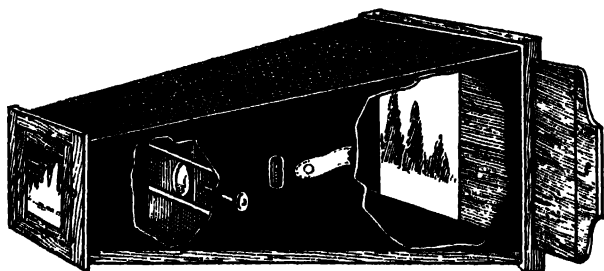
Fixed-focus Enlarging Box with Detachable Holder of the paper
